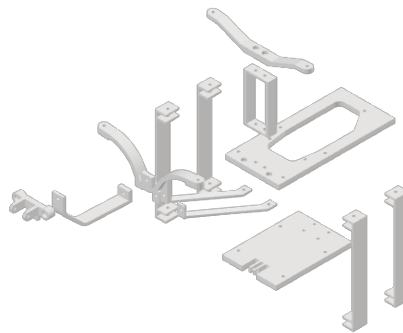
Exploded view of the base realised on Autocad Inventor.
